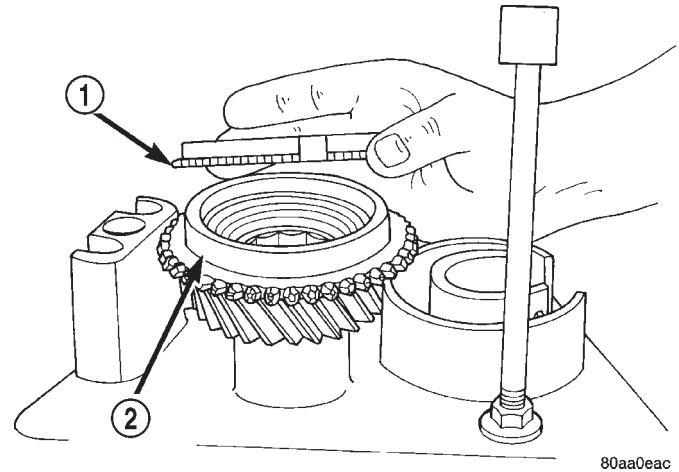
PILOT BEARING AND INPUT SHAFT
